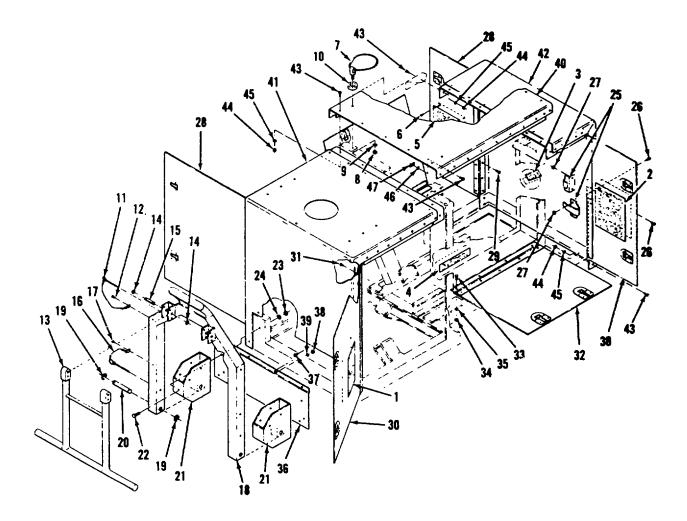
Decals, Doors, Tow Bar, Housing - Exploded
